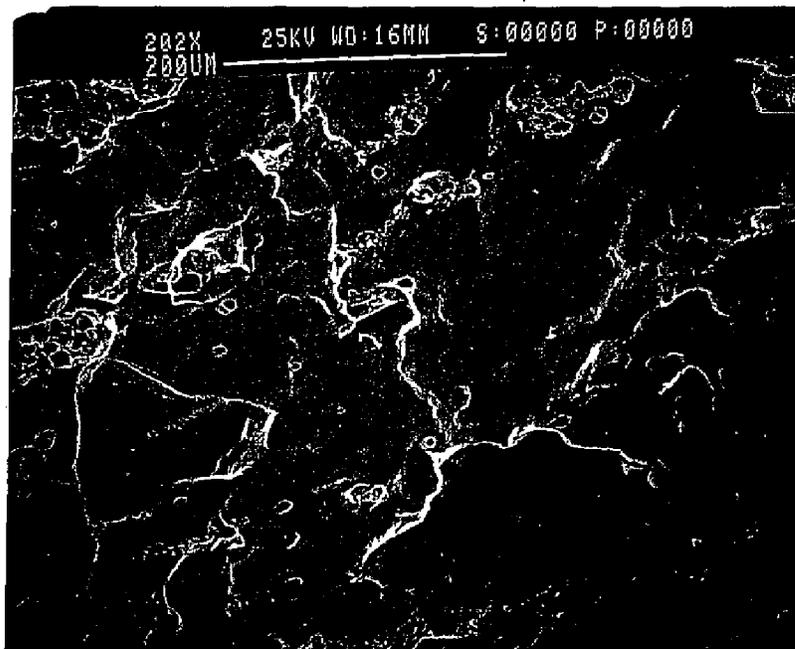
Fractograph from location #5 shows similar features as in Figure 24. The fracture initiated along the metal fold formed on the inside surface during manufacturing process; X202.
